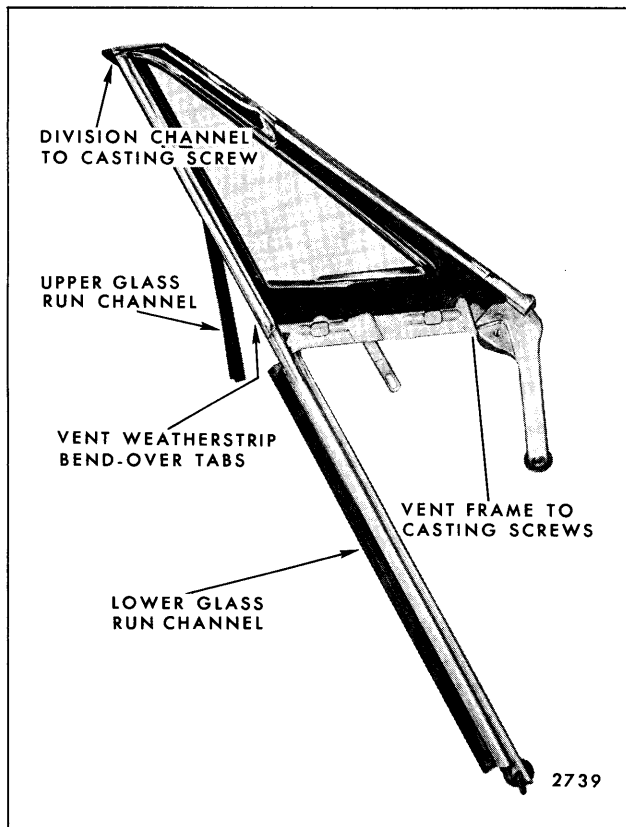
Front Door Ventilator Assembly - "A, B & C" Hardtop and Convertible Styles
